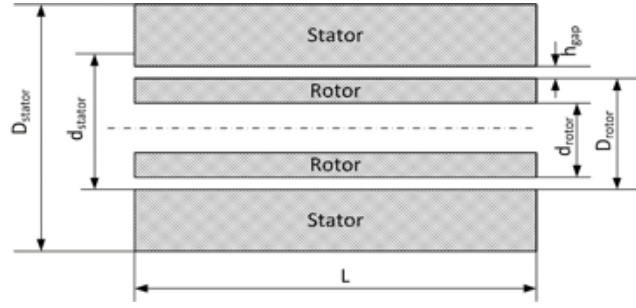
Geometry of AC motor components (adapted from [18])
